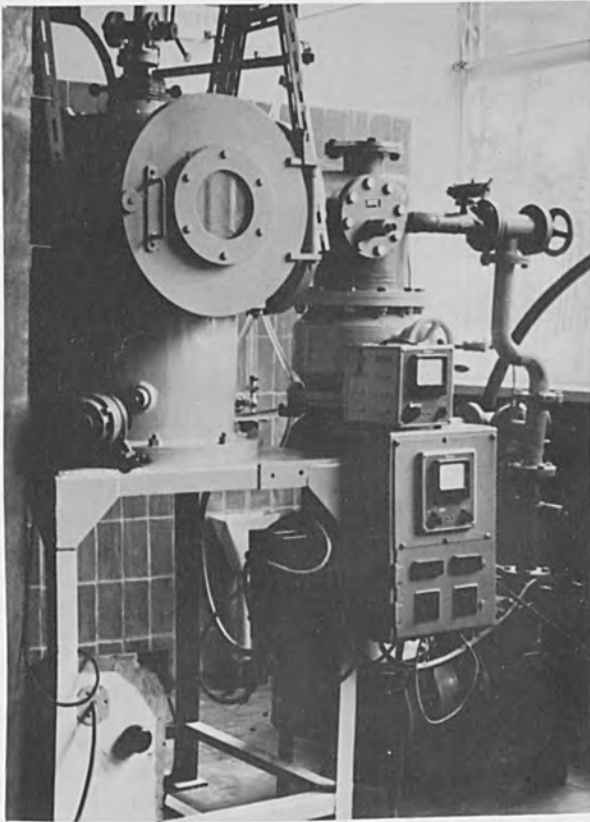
Equipment used at the C.E.N. laboratory for welding.
